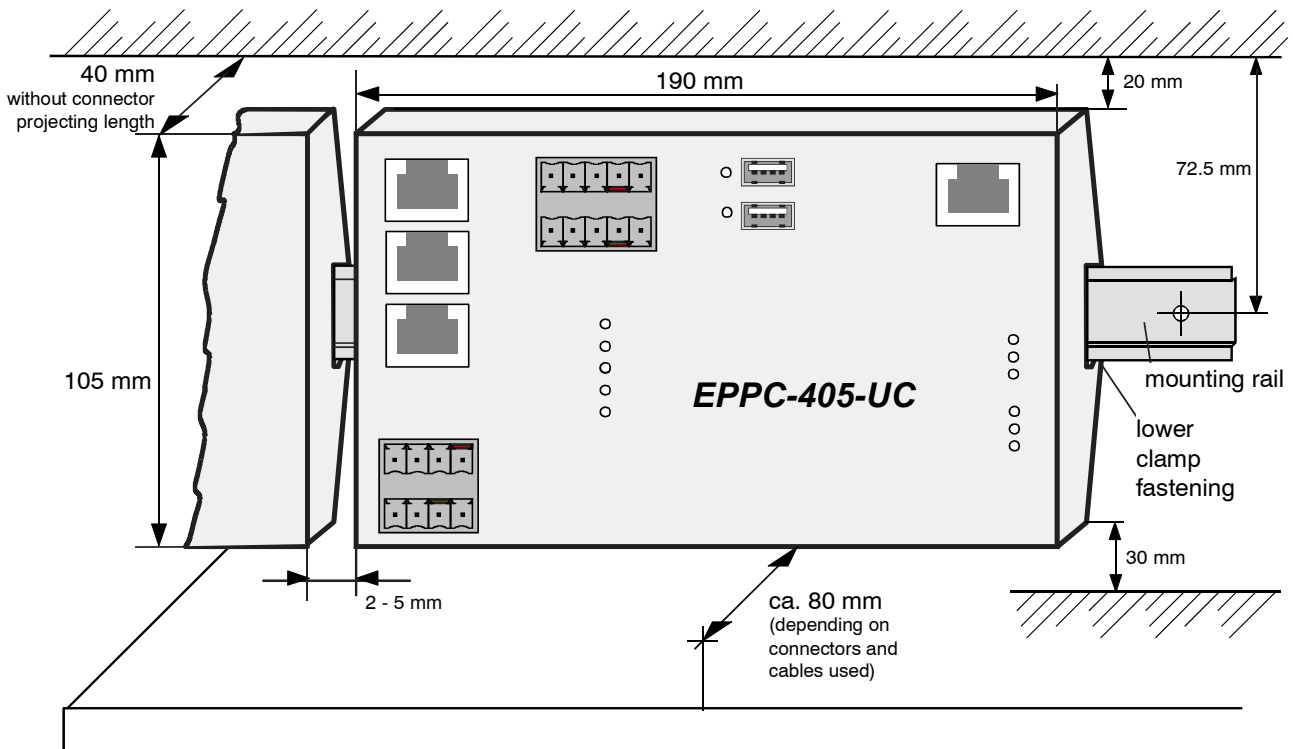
Dimensions of the EPPC-405-UC module
